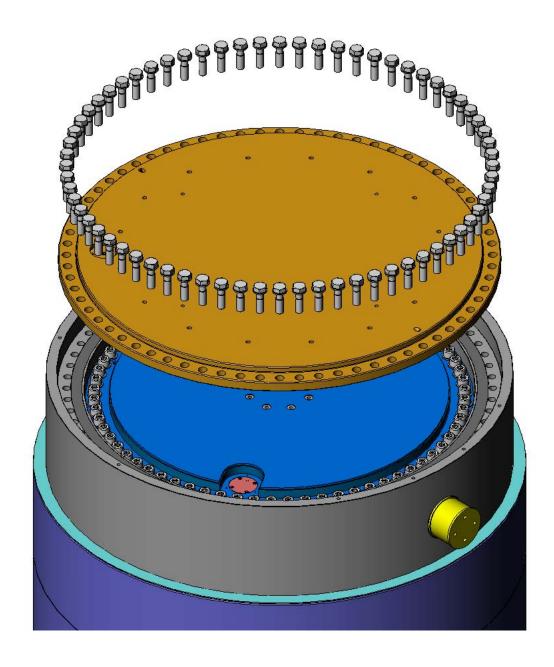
A.7: HI-STAR 180 OUTER CLOSURE LID EXPLODED VIEW (EXAMPLE ONLY, SHOWN FOR ILLUSTRATION ONLY)
